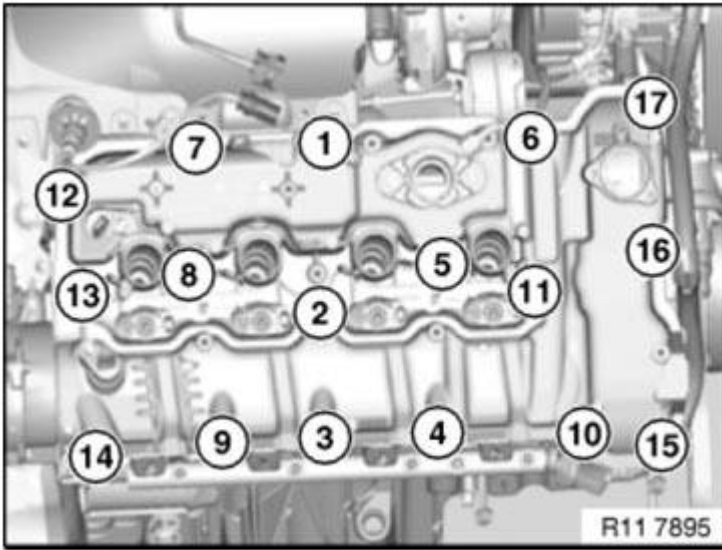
Identifying Cylinder Head Cover Bolts Releasing Sequence
